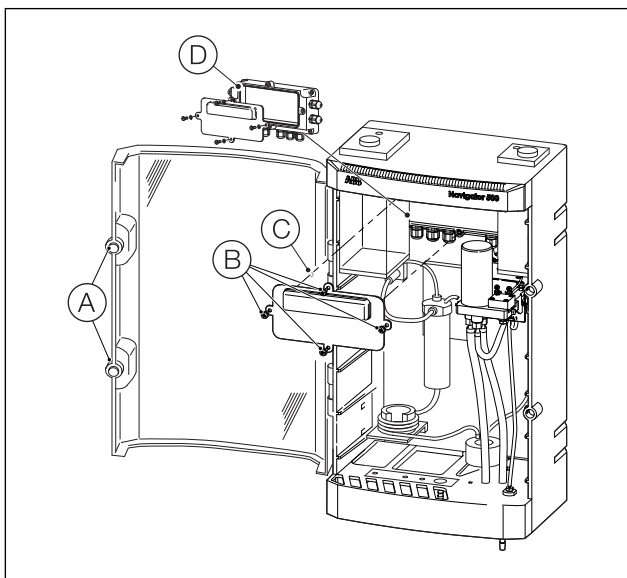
Removing the wet-section cover (hydrazine wet-section shown)
